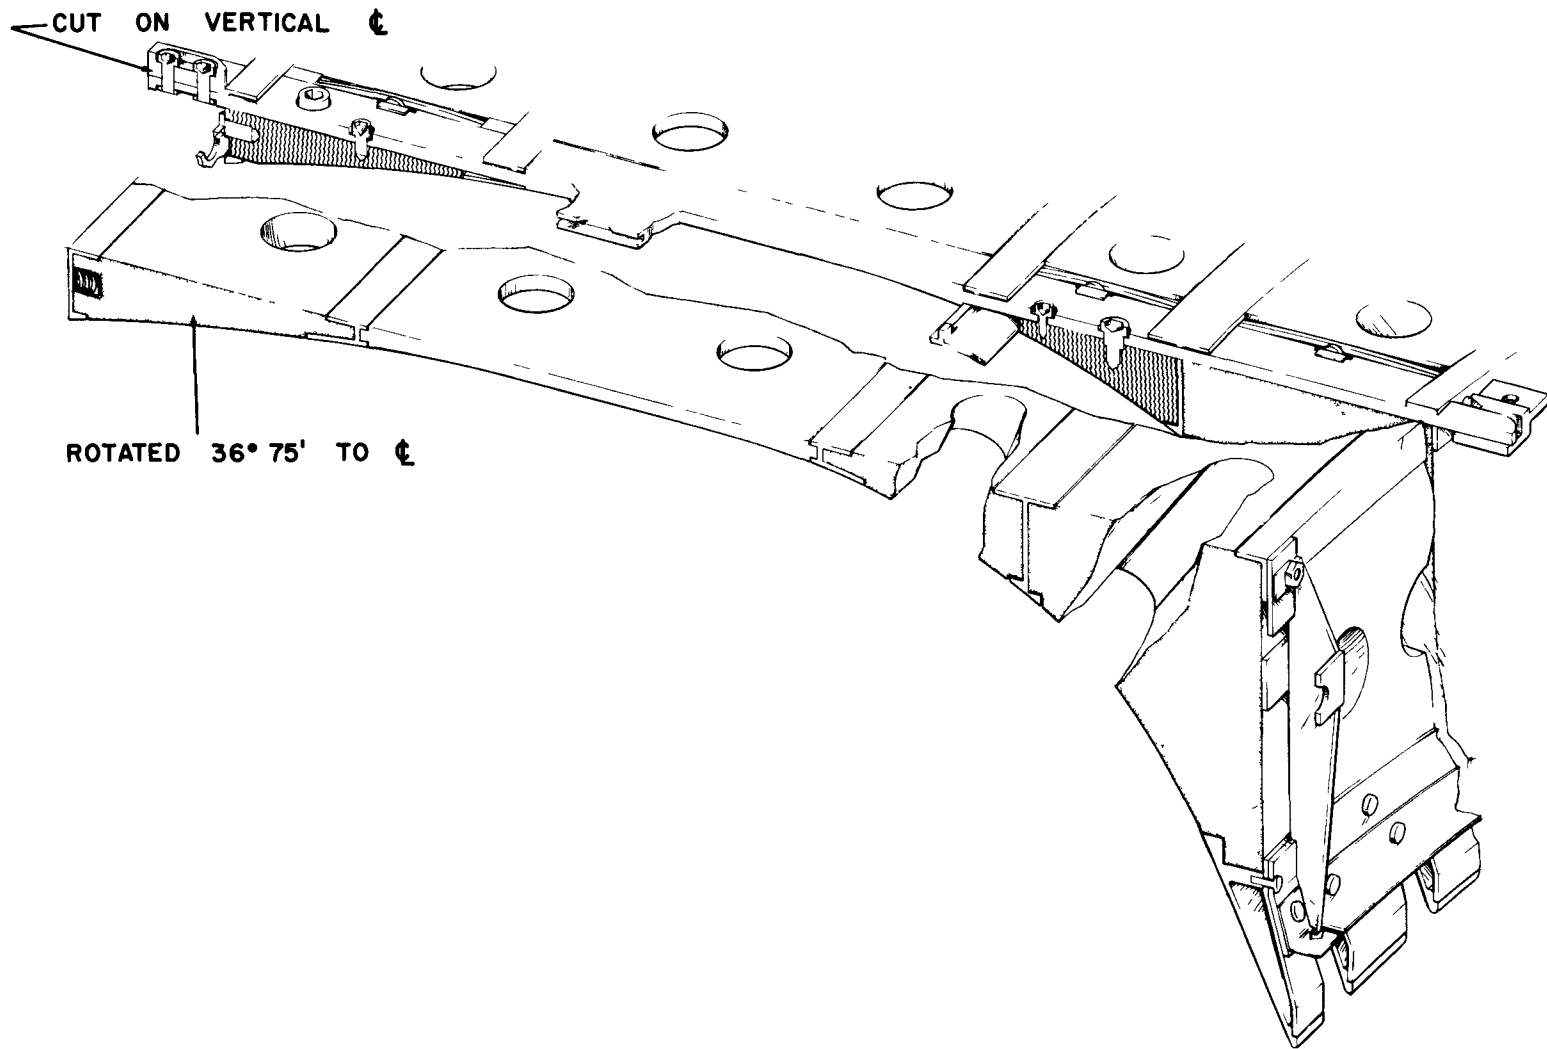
Front shield outer section, aft assembly (Dwg. DI546)
